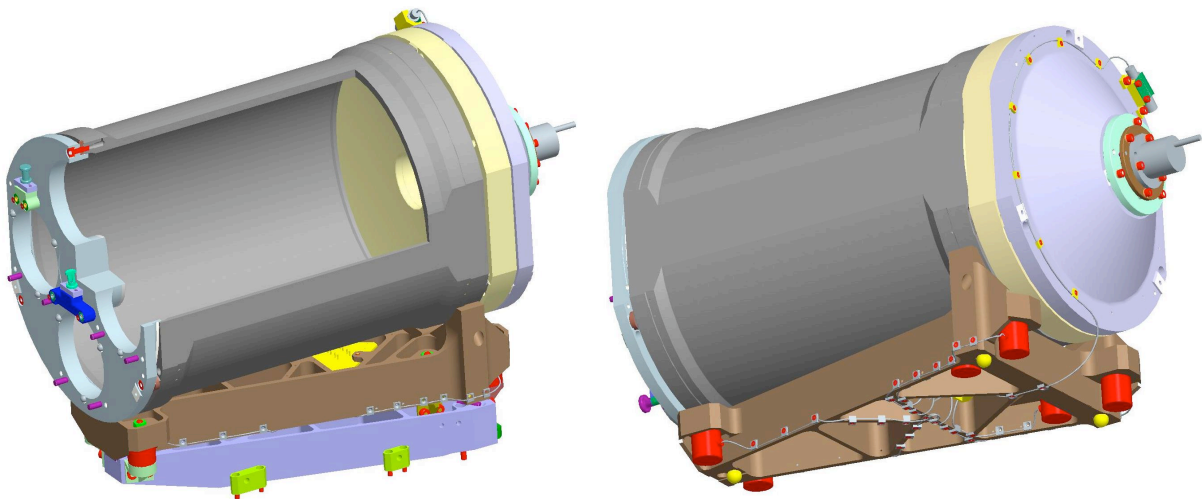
3D CAD drawing of the cat's eye and adjustment plate assembly.
